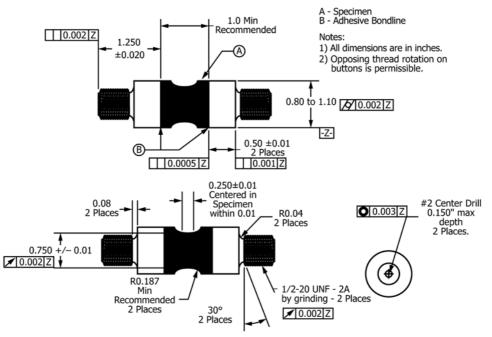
Drawing of End Tabs and "Spool" Specimen Assembly (inch-pound units)
